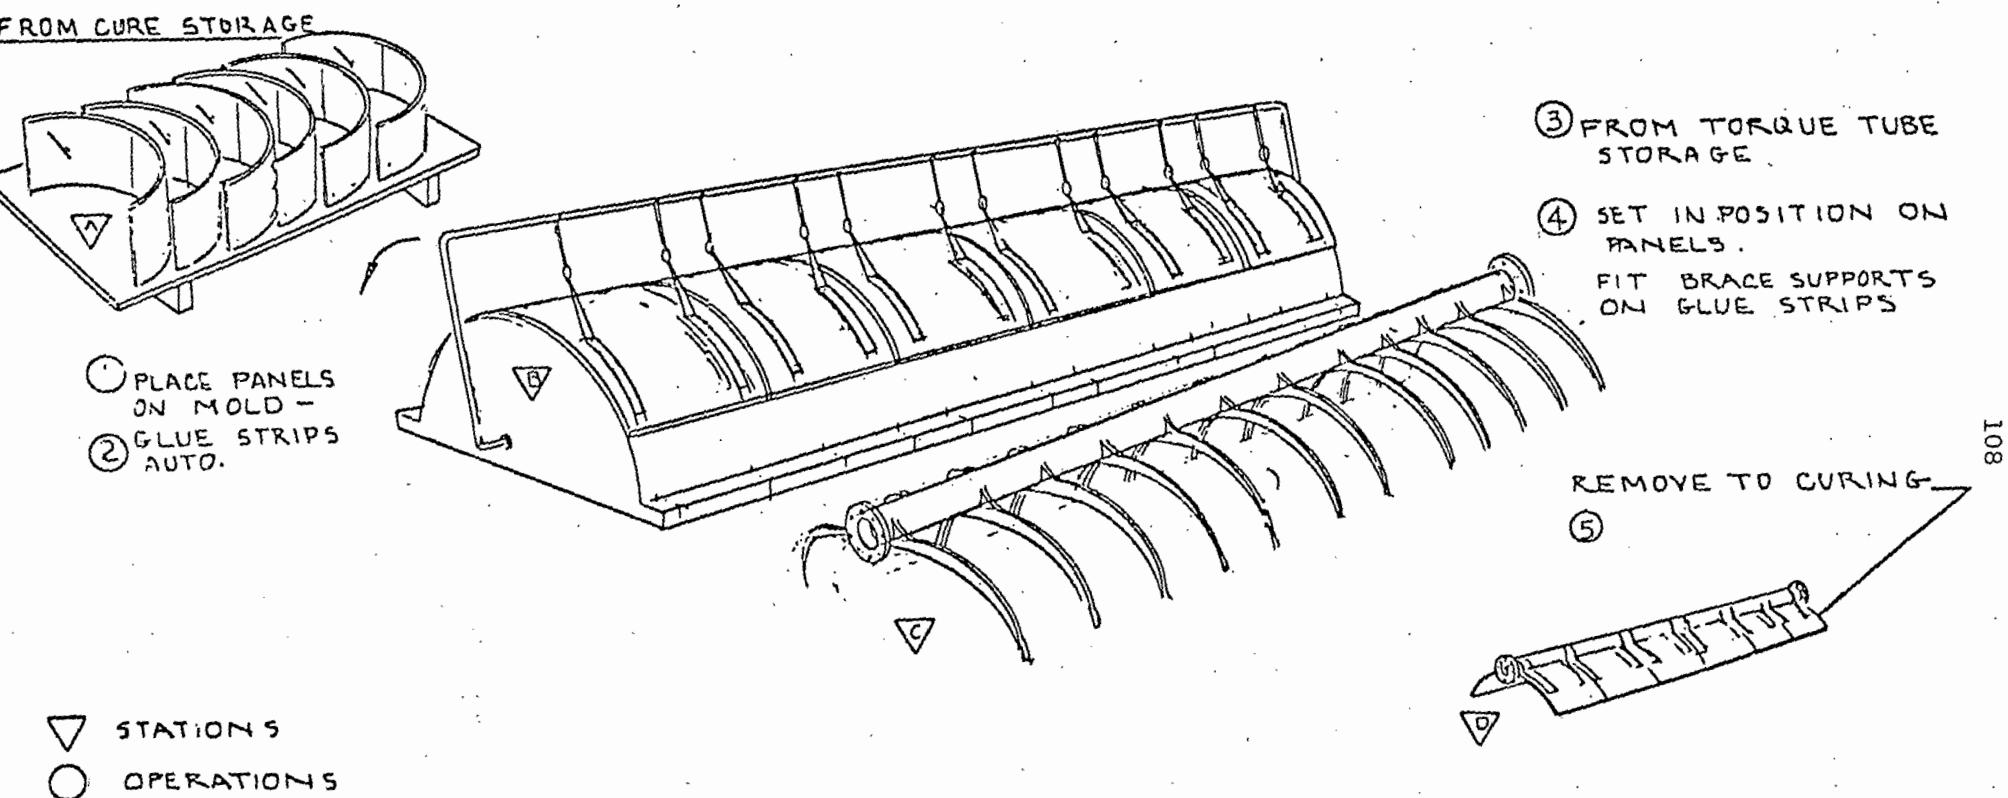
TORQUE TUBE & REFLECTOR ASSEMBLY
